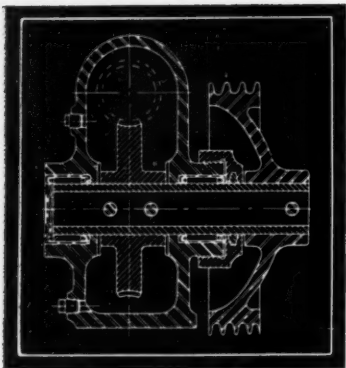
Bearings in wing flap control gear-box carry high radial loads
